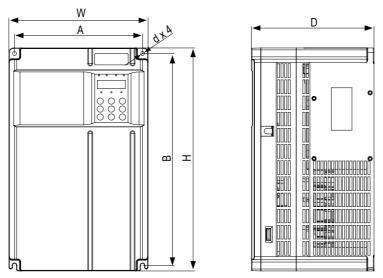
Overall and mounting dimensions of MD290T45G/55P(B) to MD290T160G/200P and MD290-2T22G/30P(B) to MD290-2T55G/75P
